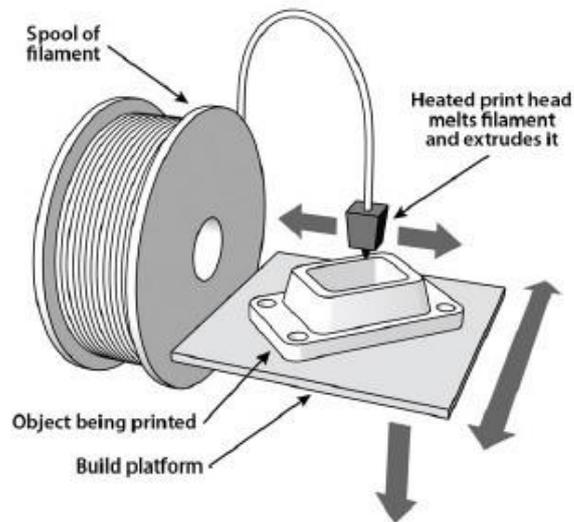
Schematic of extrusion 3D printing [5, p. 25]
